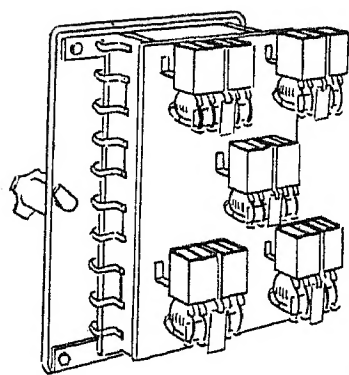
A.—Built-in control gear for several motors on woodworking machine.
